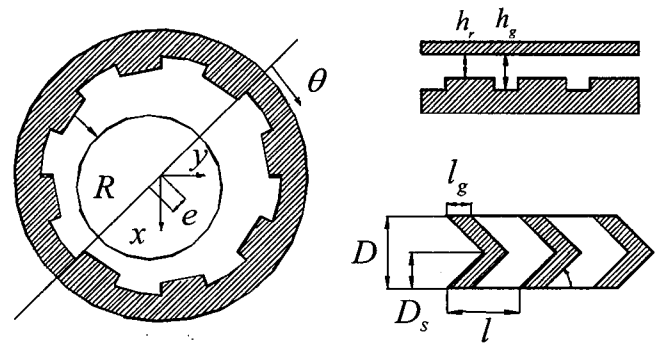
Schematic of Herringbone groove journal bearing with rectangular-profile grooves and definitions of bearing parameters (groove depth ratio for concentric position ($\Gamma=h_s/h_r$), groove width ratio ($\alpha=l_g/l$), and groove angle (β)).
